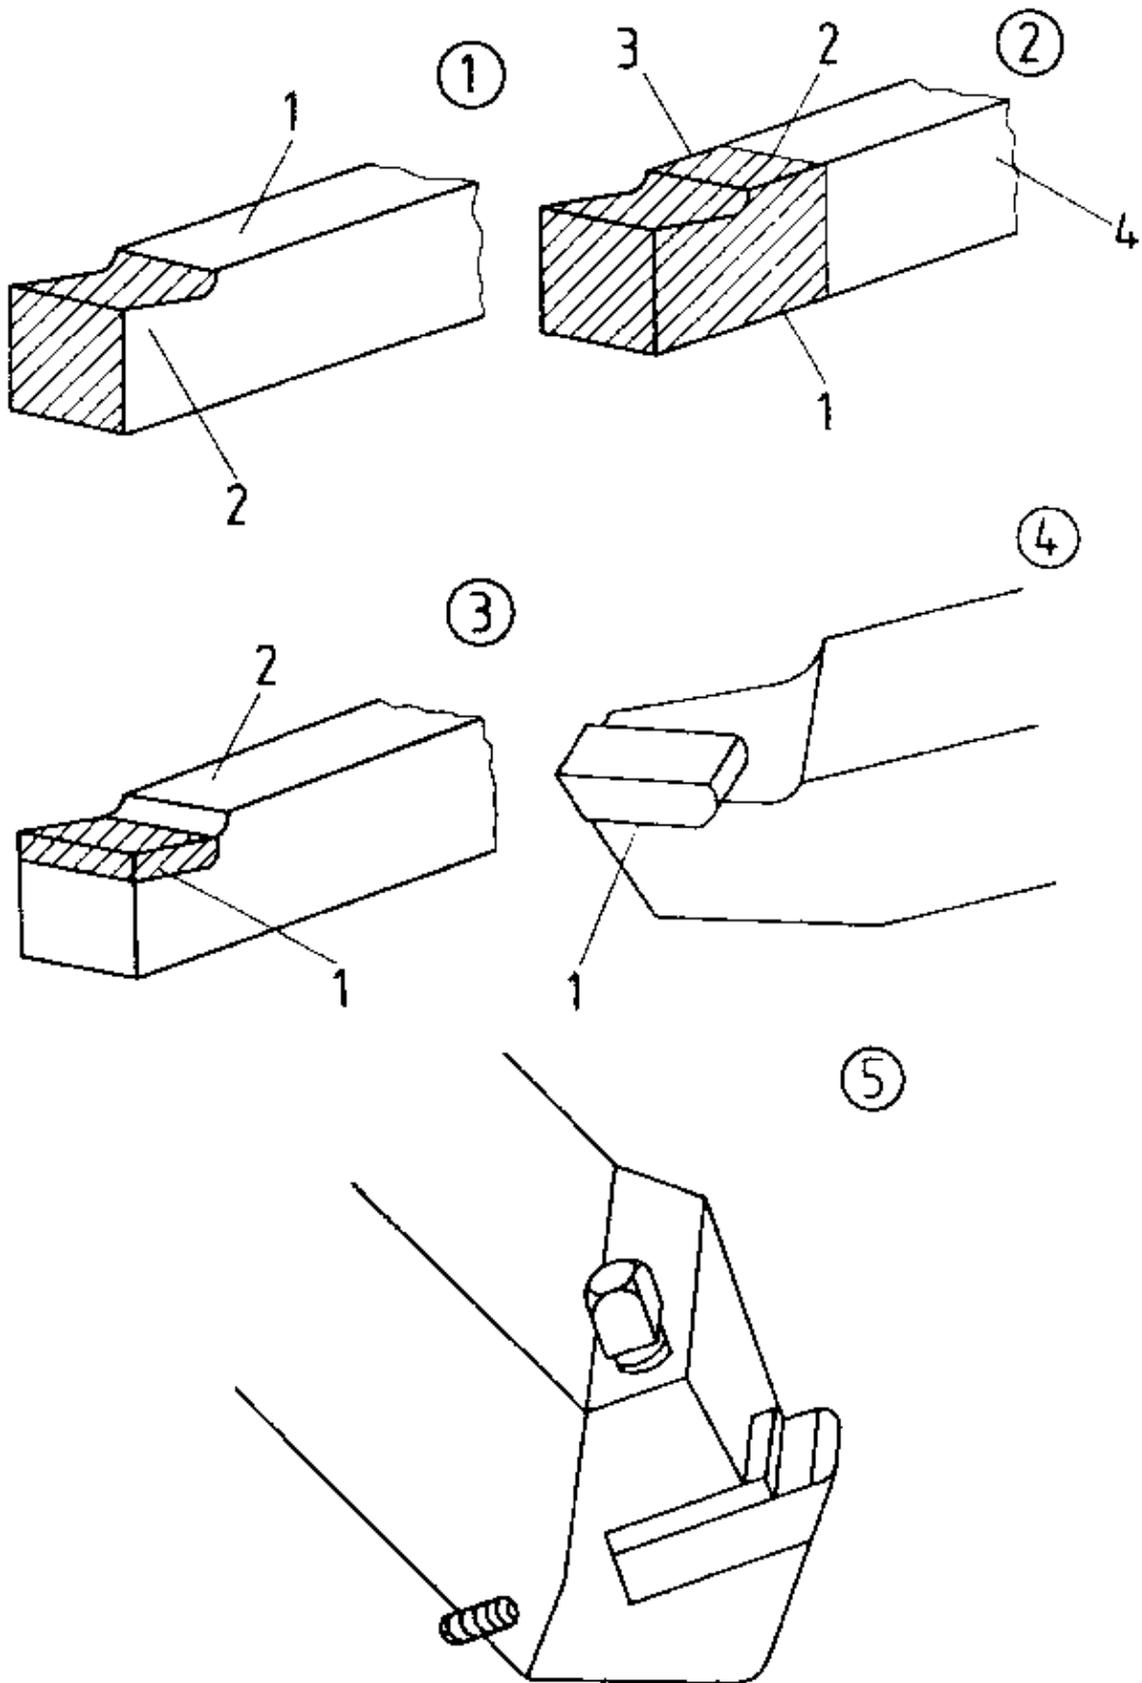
Lathe tool shank and cutting edge from solid steel or different materials
